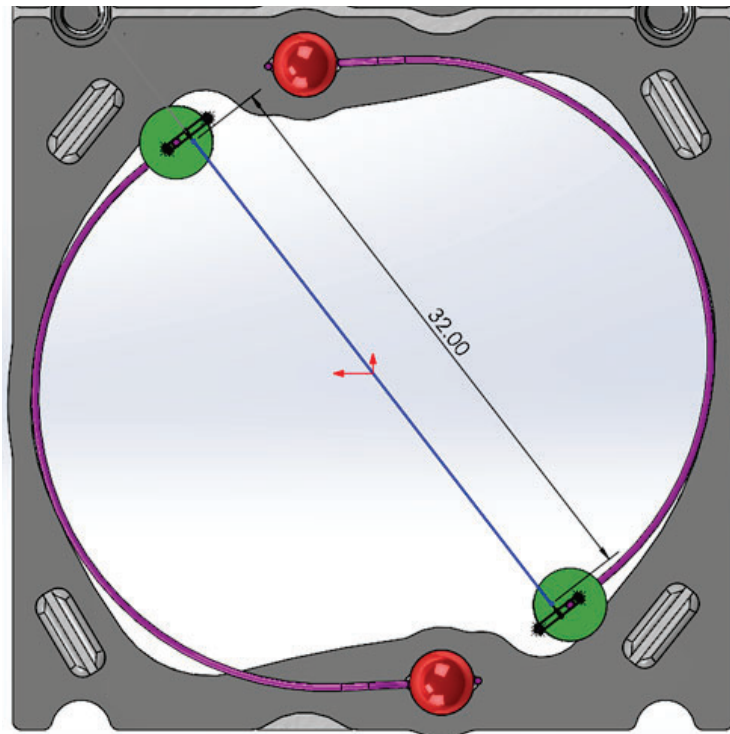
The top view of the sensor base assembled with sensing wires shows their axisymmetric positioning. The ball press fits are located such that the opposite wire ends are perpendicular to each other. This perpendicularity is needed for the basket wire to have rolling contact where it connects to the sensing wire. The distance between these basket wire crooks with this mounting is 32 mm to match the deflecting arm's 16 mm radius of curvature.
